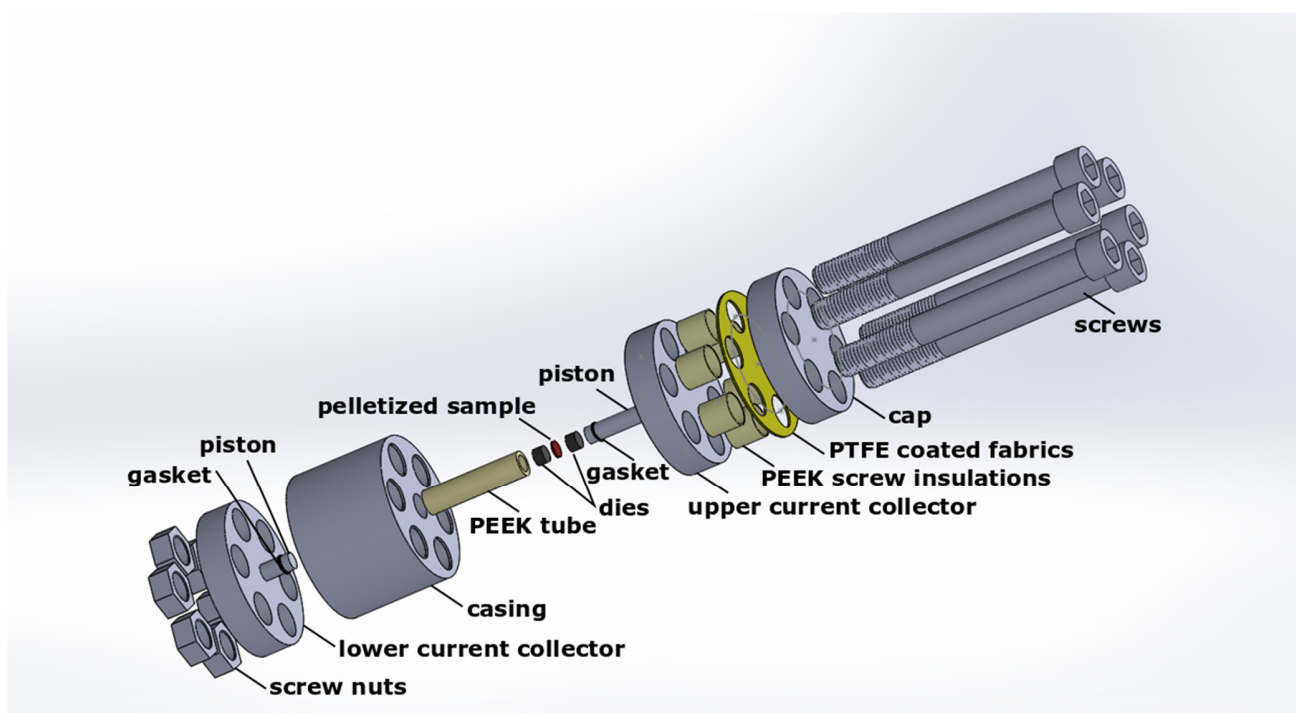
Explosion view of the cell assembly consisting of two stainless-steel current collectors, a stainless-steel casing, a PEEK-tube, hardened stainless-steel dies and pistons, each comprising a gasket for tightening the cell. The pressure is applied by fastening the six screws (including screw nuts) with a certain torque. The screws are electrically insulated from the upper current collector by PEEK-insulation tubes and PTFE coated fabrics (Fiberflon, Germany). The stainless-steel cap is for protecting the PTFE coated fabrics (Fiberflon, Germany) from abrasion by the screws.
